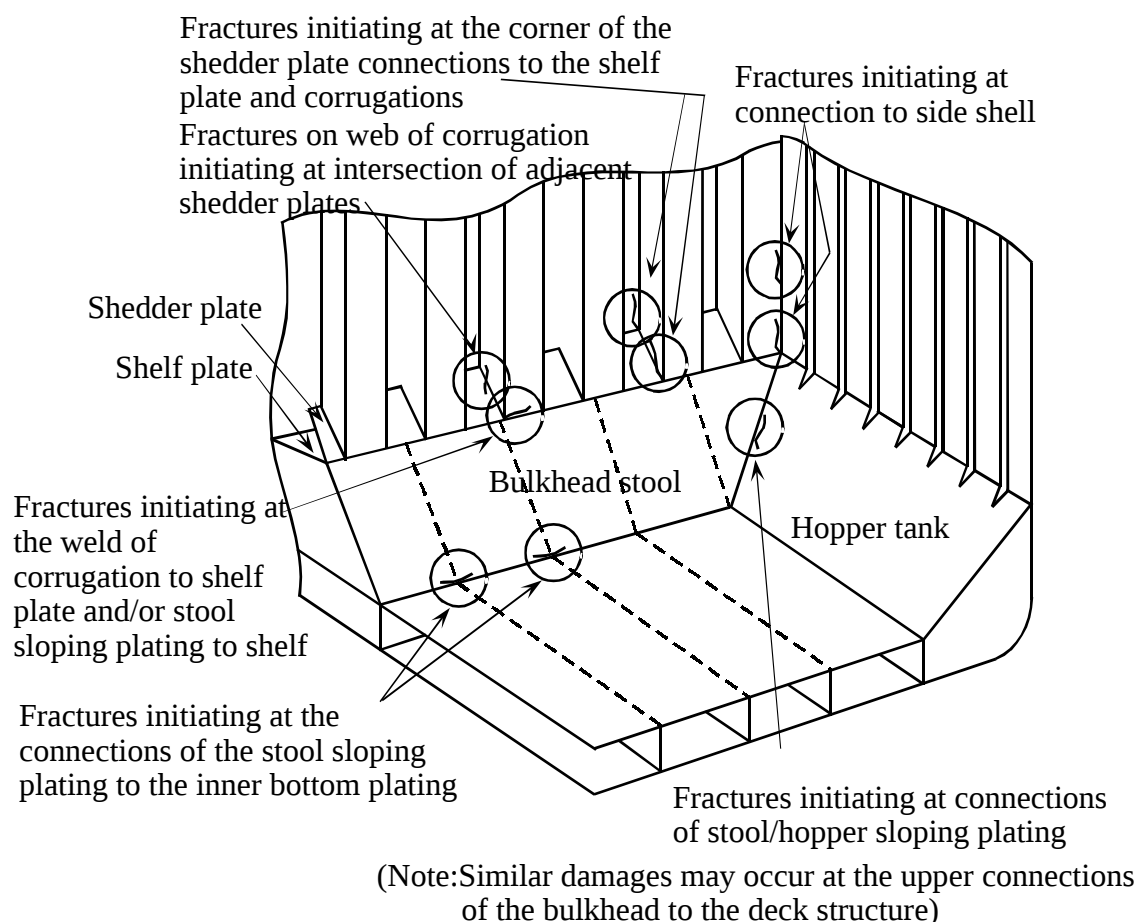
Typical fracturing at the connection of transverse bulkhead structure
